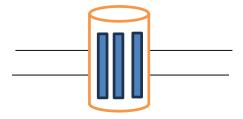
Wheel type probe arrangement for transverse defects oriented at 90 degrees to weld. Figure (7) showing a wheel probe on top of weld to scan transverse defects in weld.
